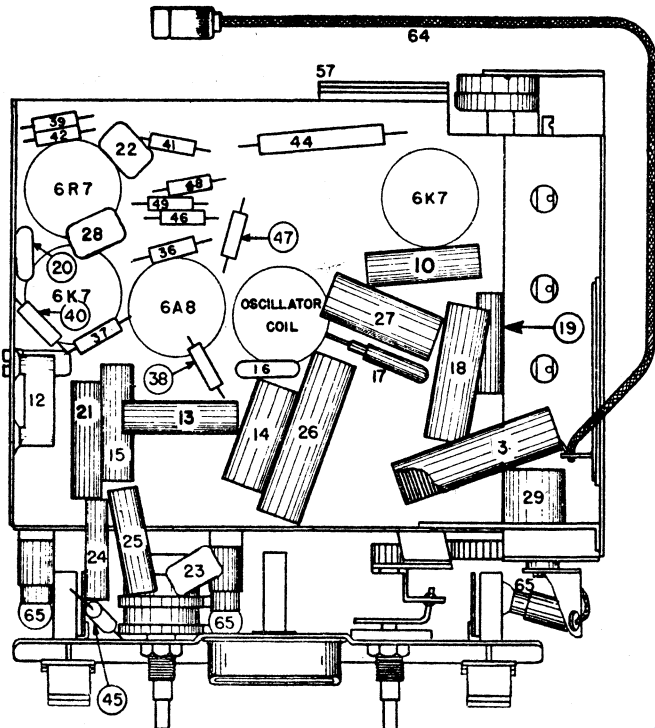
PARTS LAYOUT--I.P. UNIT--Bottom View
